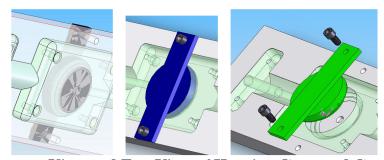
Bottom View and Top View of Housing Cam, and Cam Removal View
